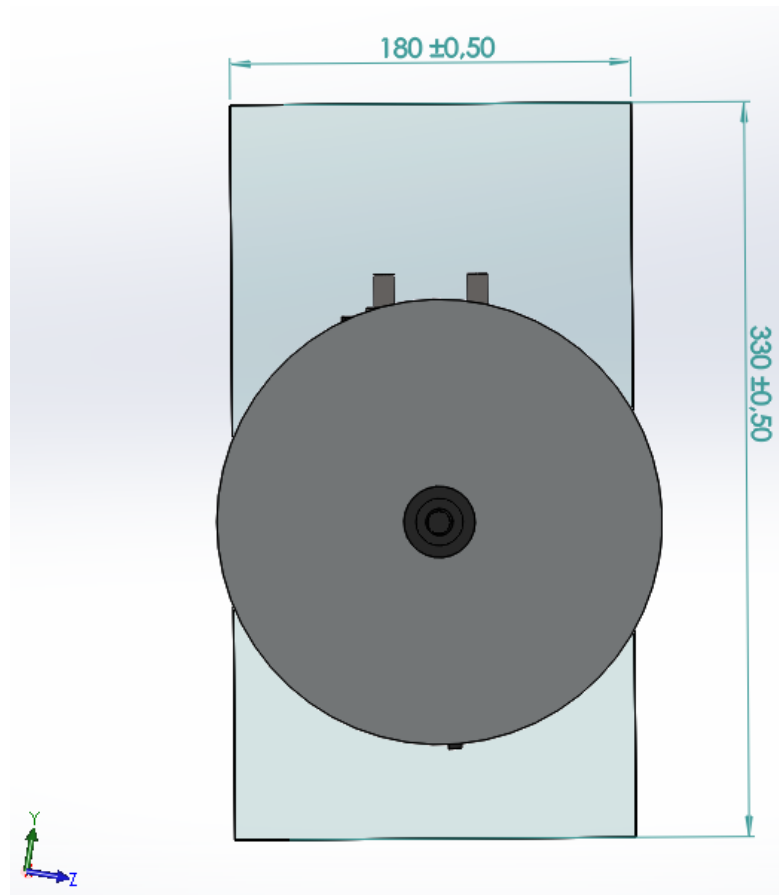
Bottom view of the proposed measurement subsystem with dimensions given in mm of the sides.
